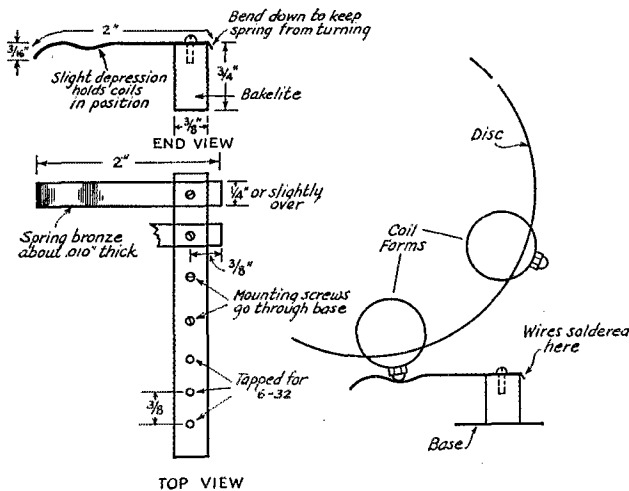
ILLUSTRATING THE COIL CONTACT ASSEMBLY
